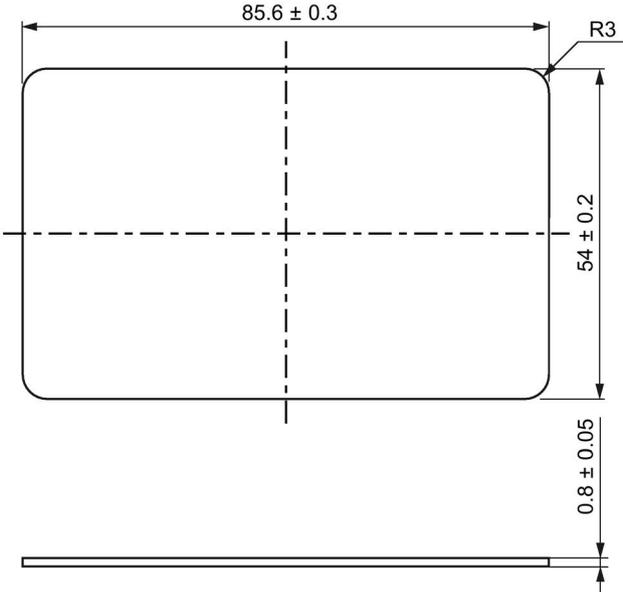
Dimensional drawing MDS D400 (dimensions in mm)
